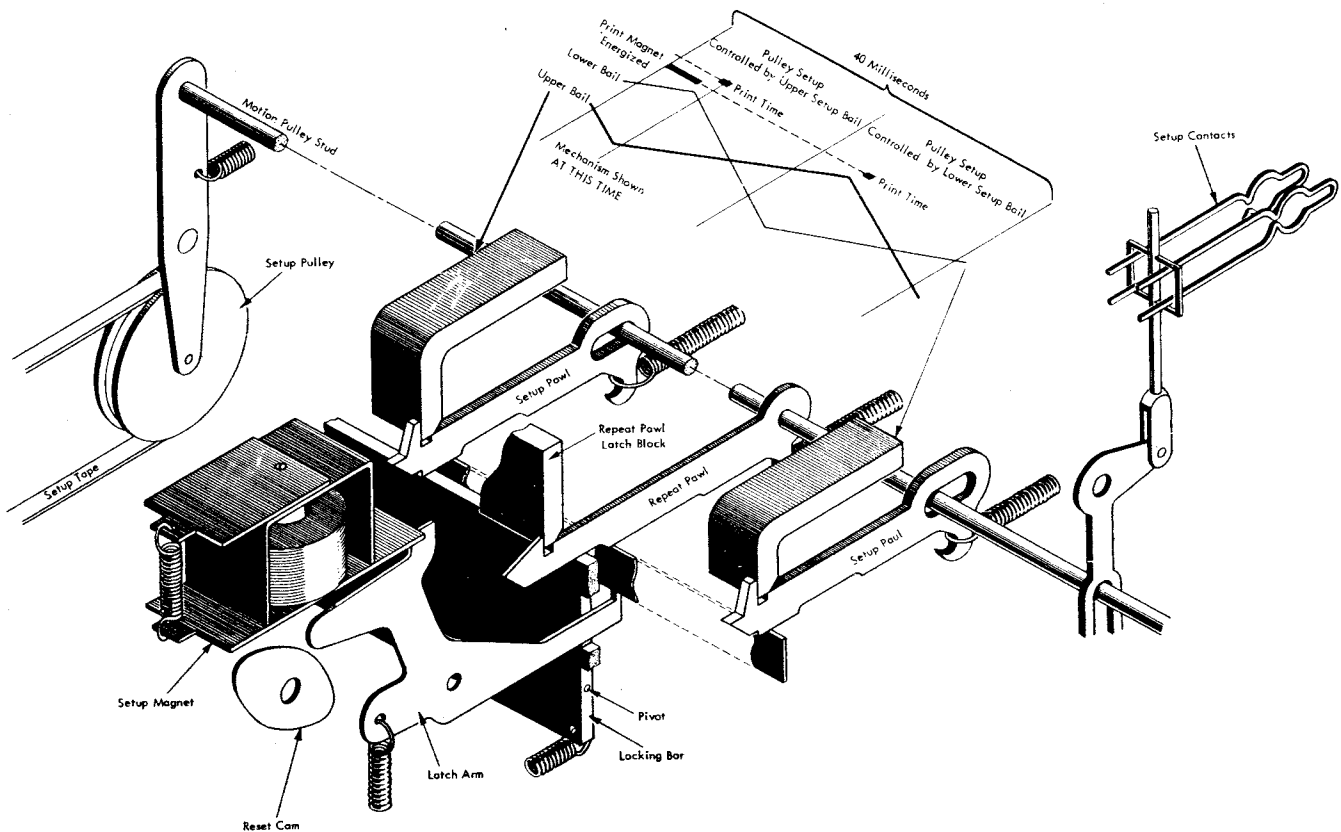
Exploded View of One Bit Position of Print Setup Unit
